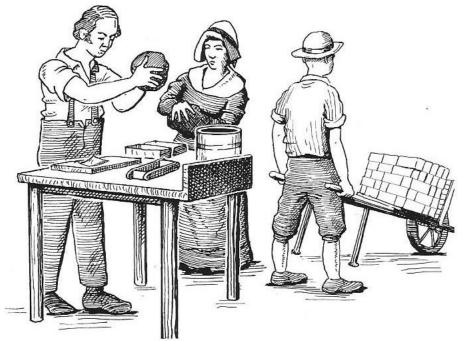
A family at work moulding sandstock bricks at a timber bench and delivering them on a barrow to the hack for drying. (Source: Ringer p14)
